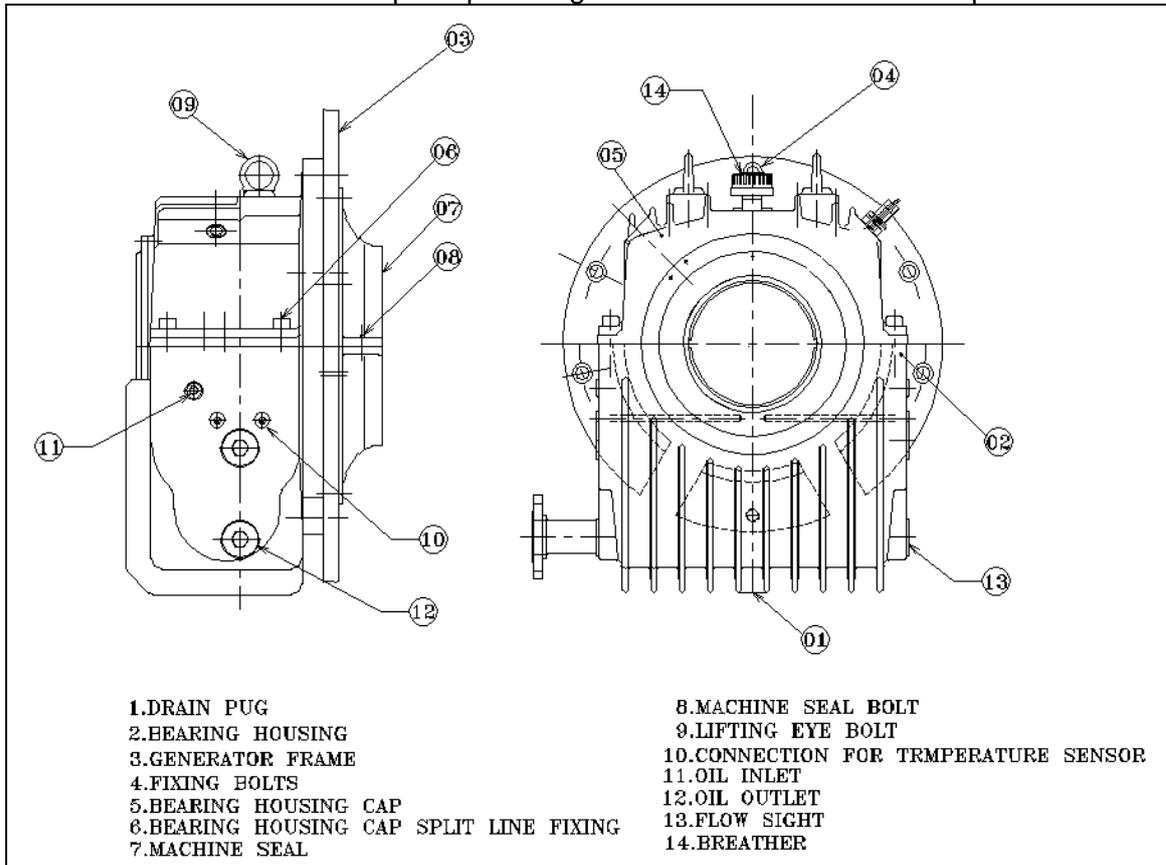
Finned, Flanged-Mounted Bearing (Typical)
